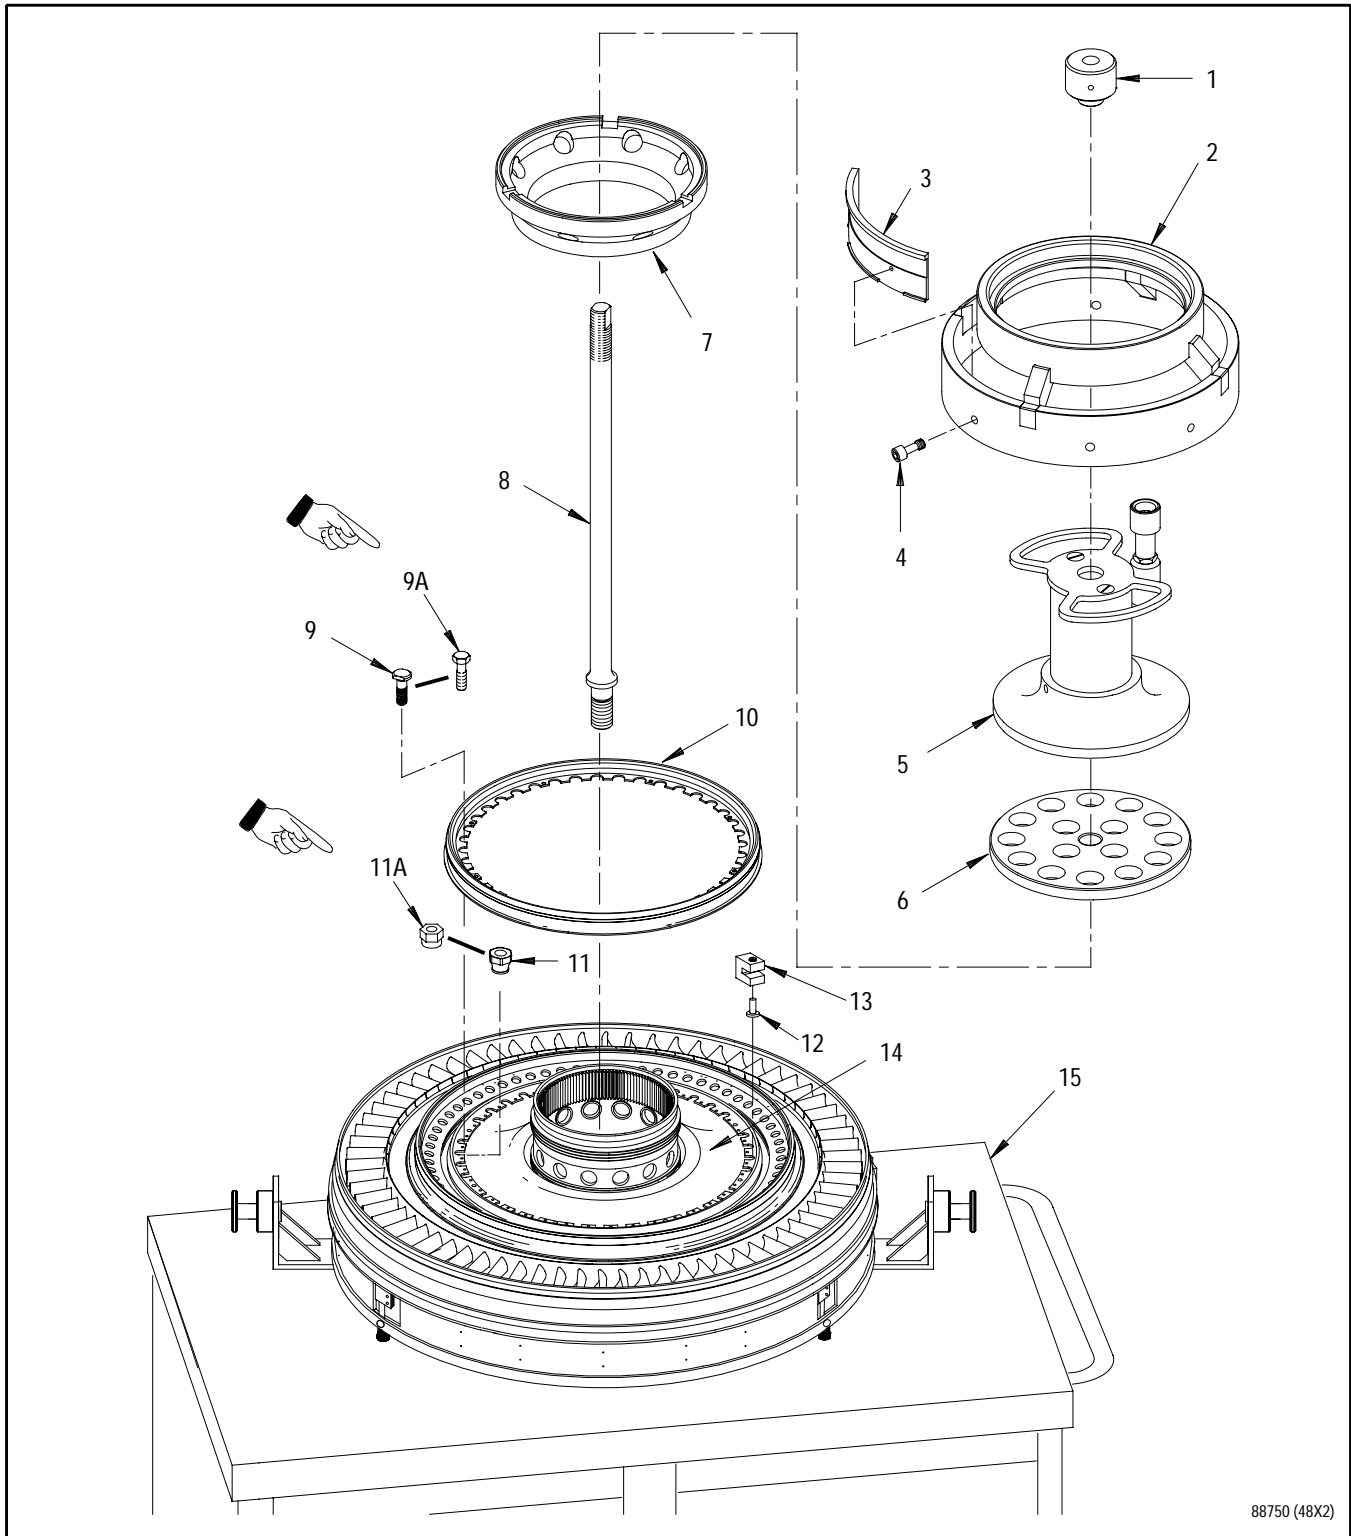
Rear Compressor Drive Turbine Rotor and Stator Assembly - Installation onto PWA 57830 Stand
